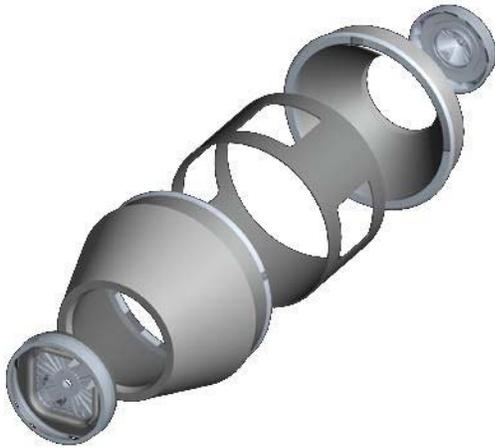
Hub exploded view. Assembly of hub components takes place on the ground.
